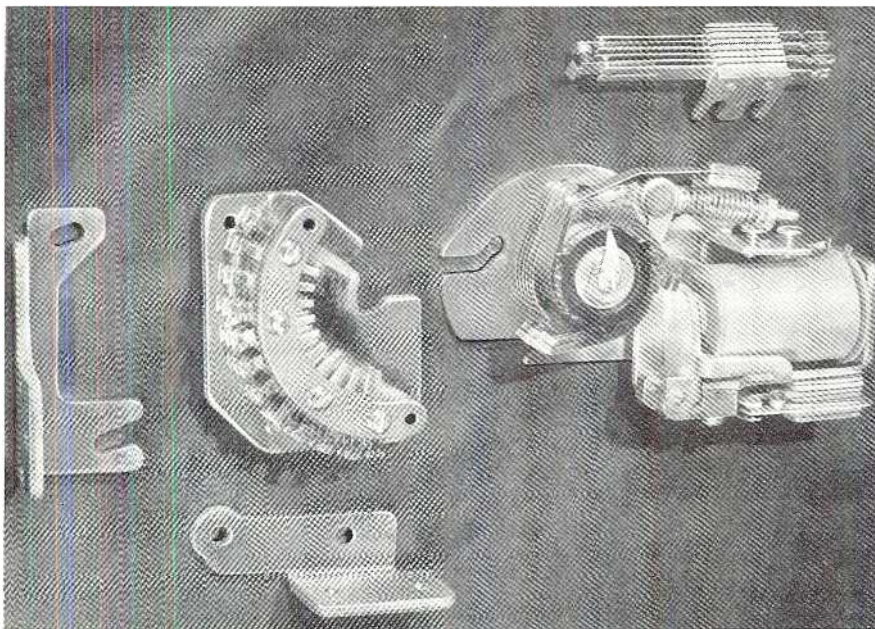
COMPONENTS OF THE SWITCH. DISASSEMBLY DOES NOT AFFECT THE DRIVE ADJUSTMENT
